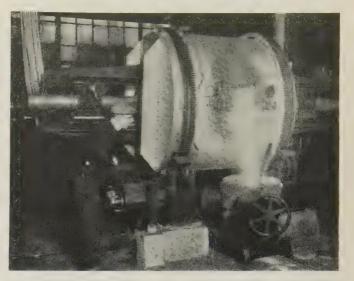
Rocking of this 3,000-lb 600-kw furnace is obtained with ring gear drive
